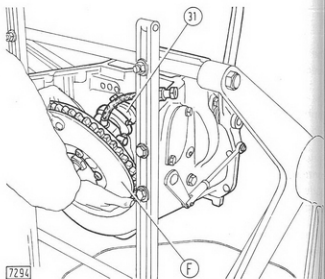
Dismantling (or Reassembling) the Clutch with the Gearbox on Rotary Stand Part No. 290086
